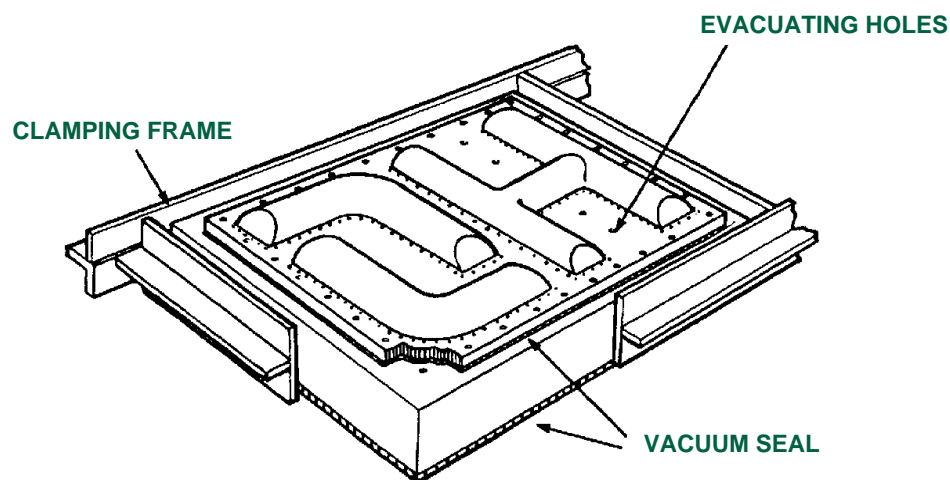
VACUUM FORMING MOULD - DRAPE TYPE
